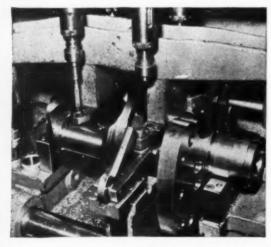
An operation similar to that shown in Fig. 3, being performed with the crankshaft throws in a horizontal position.
